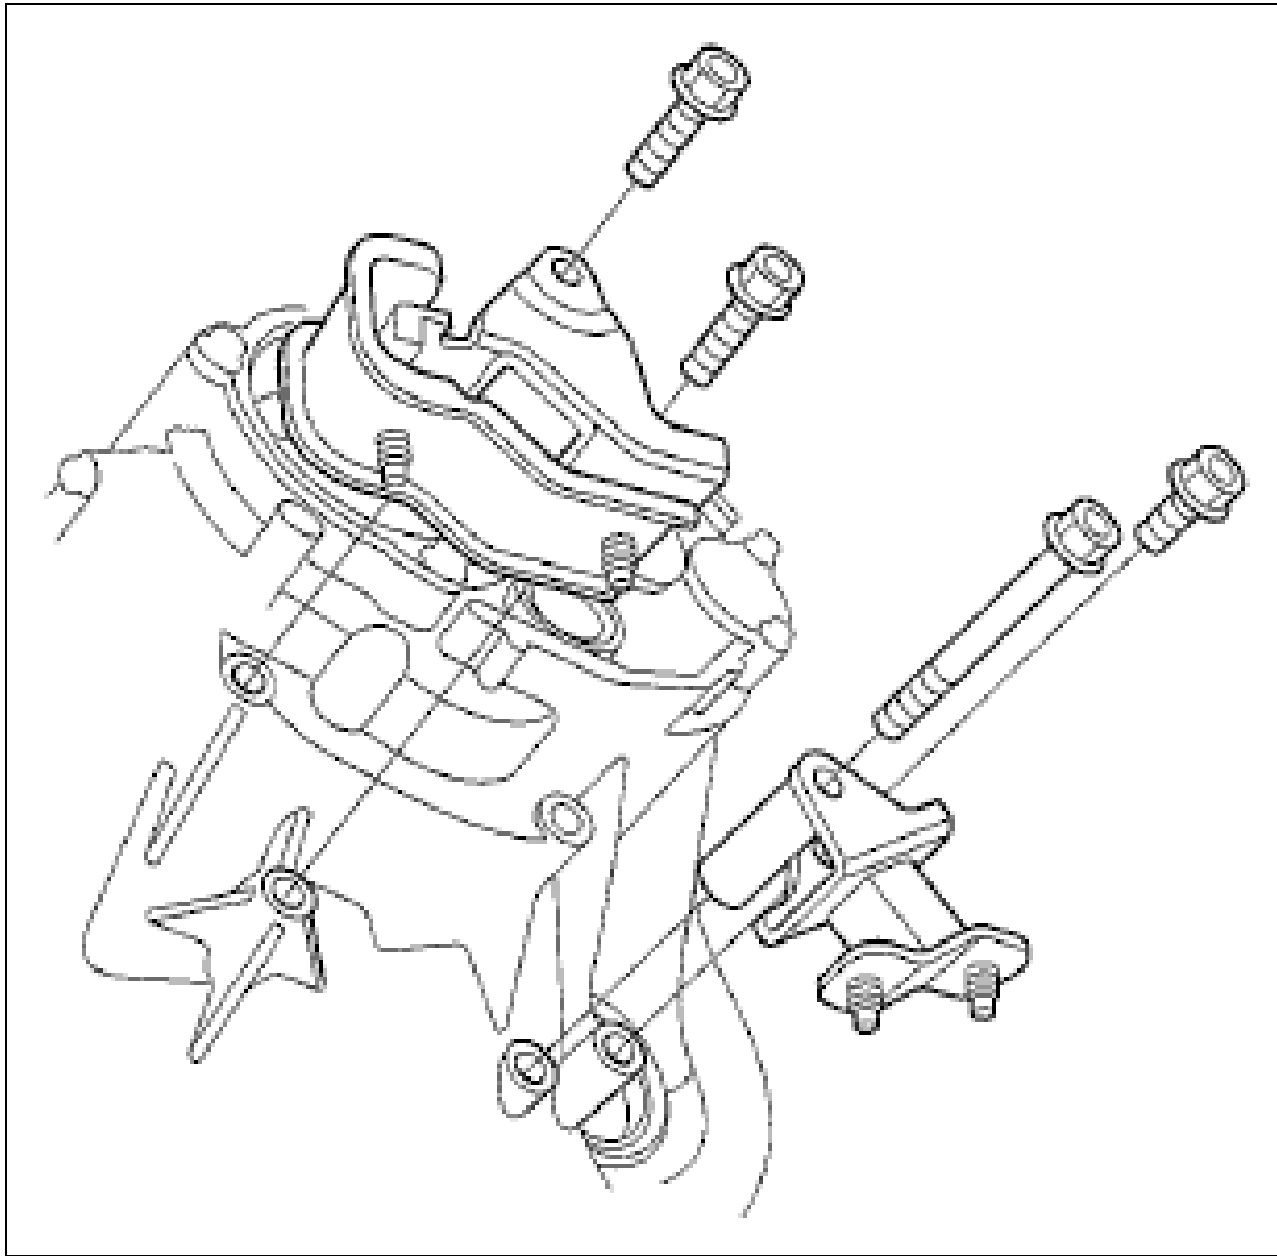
Identifying Front Stiffeners, Rear Stiffeners And Subframe Mounting Bolts
